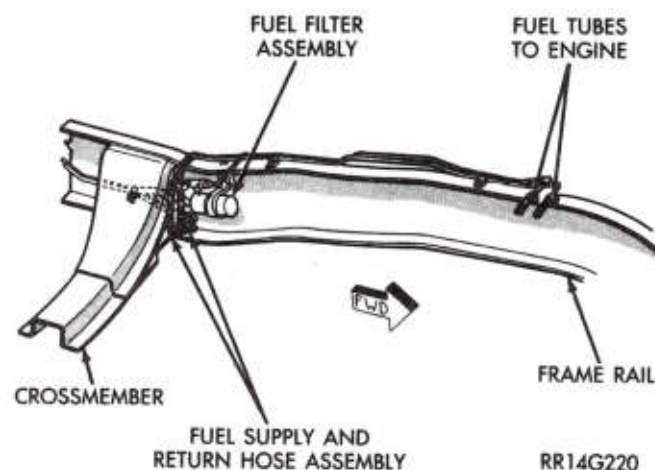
Fuel Filter 3.9L and 5.2L Engines
